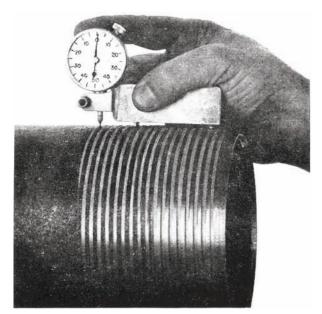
Typical Run-Out Gauge for Buttress Thread Casing
